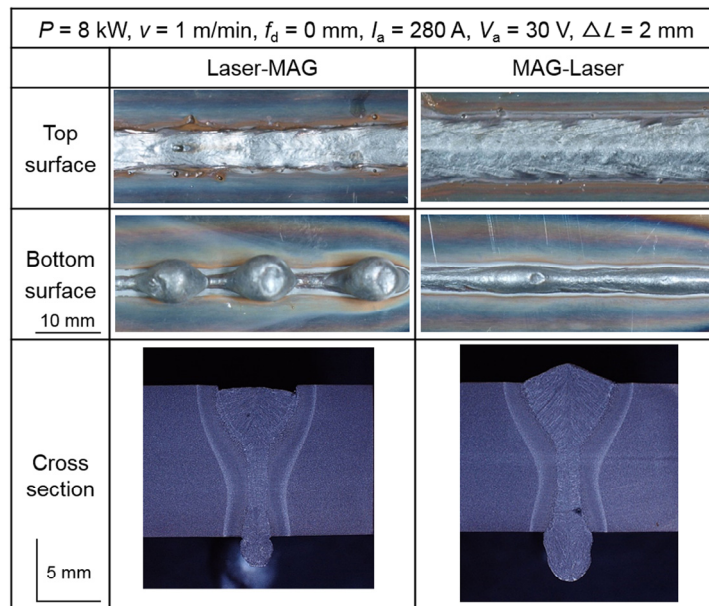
Surface appearances and cross sections of weld beads produced by Laser-MAG and MAG-Laser hybrid welding.
